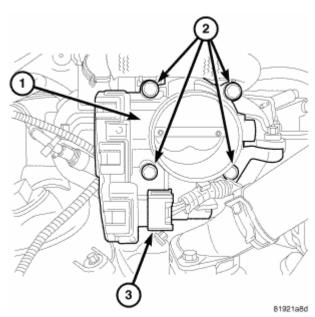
Throttle Body 3.8L Courtesy of CHRYSLER LLC
